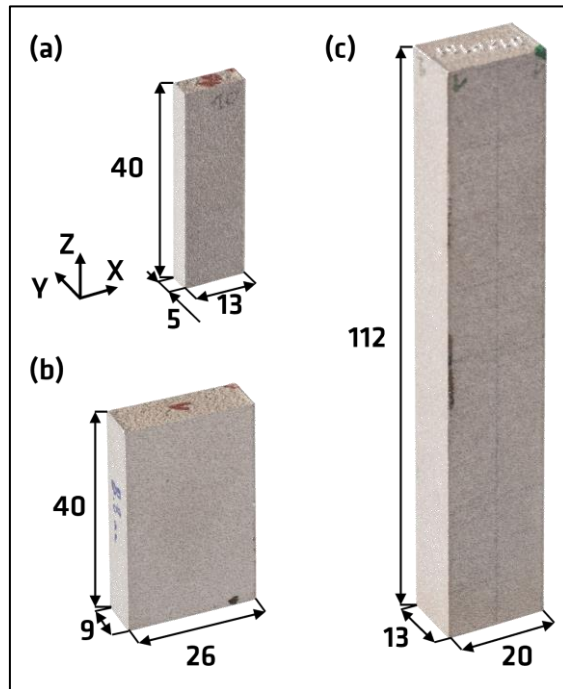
a) and b) wall specimens 5mm_13mm and 9mm_26mm, and c) large as-built specimen. All dimensions are in mm.
